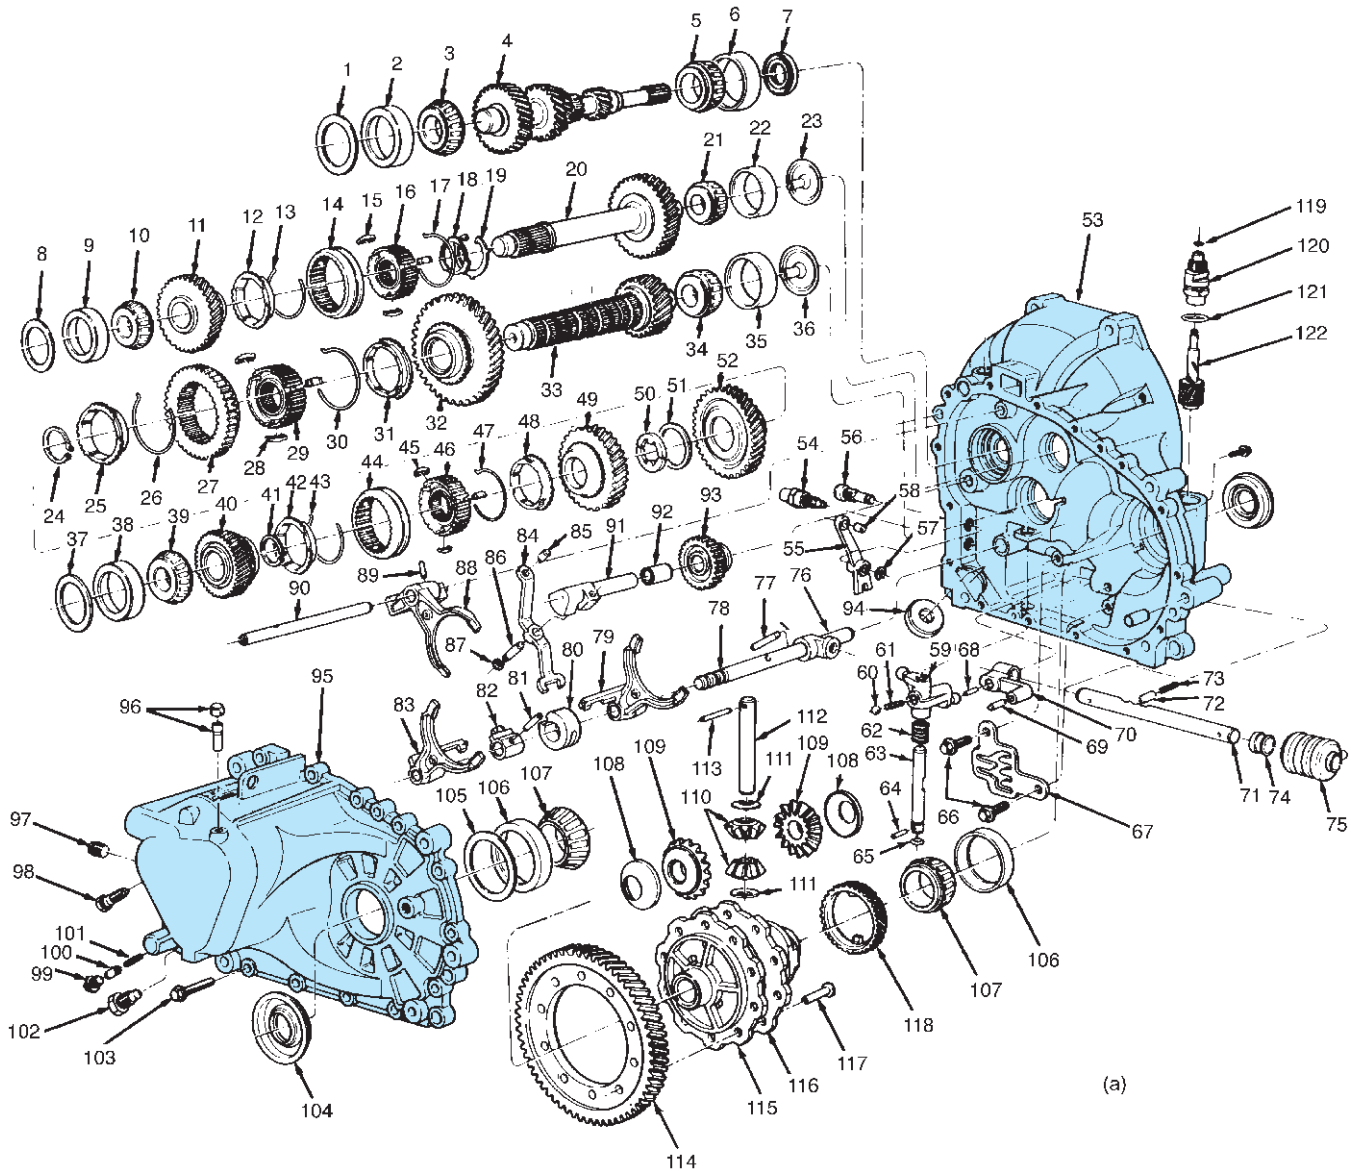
(a) Most transaxles locate the gear assemblies in the case (95) and the case/clutch housing (53). (a is courtesy of Ford Motor Company)
